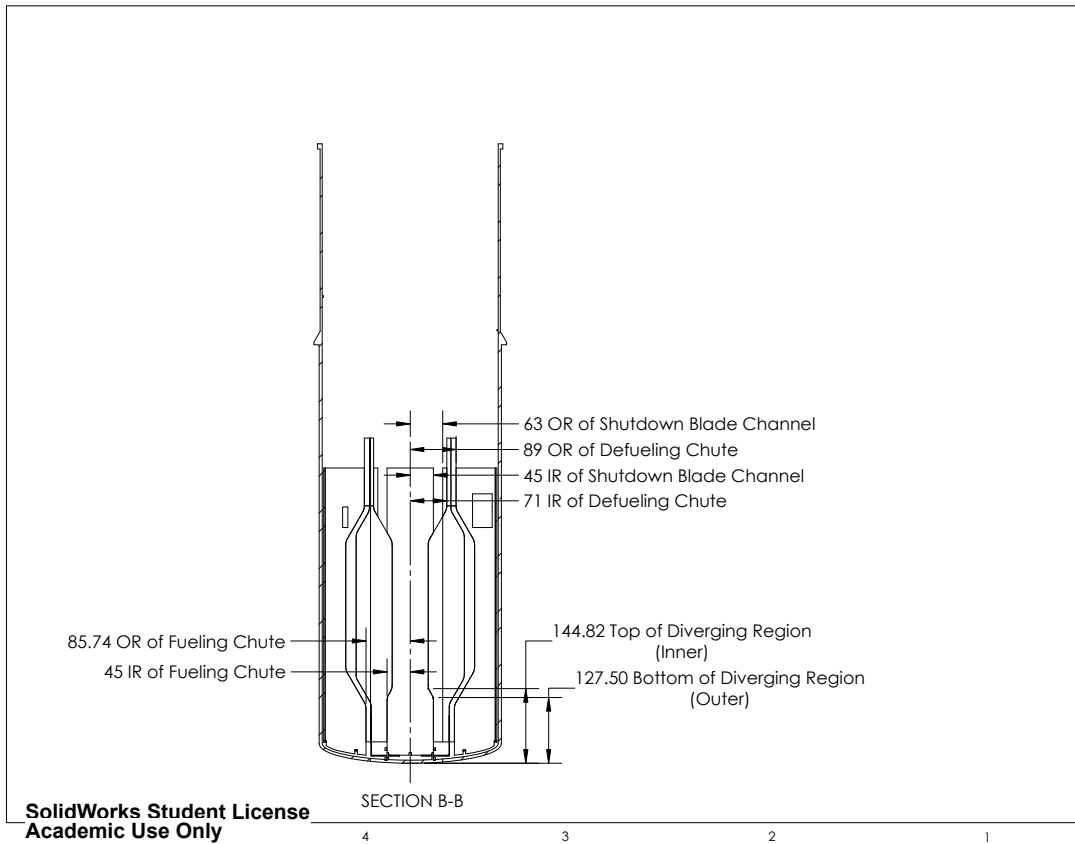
Design drawing of the Mk1 PB-FHR design: Section B-B
